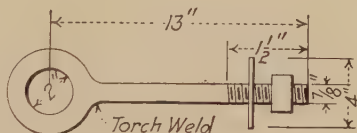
Eye bolt to build in manhole wall for pulling cable.
